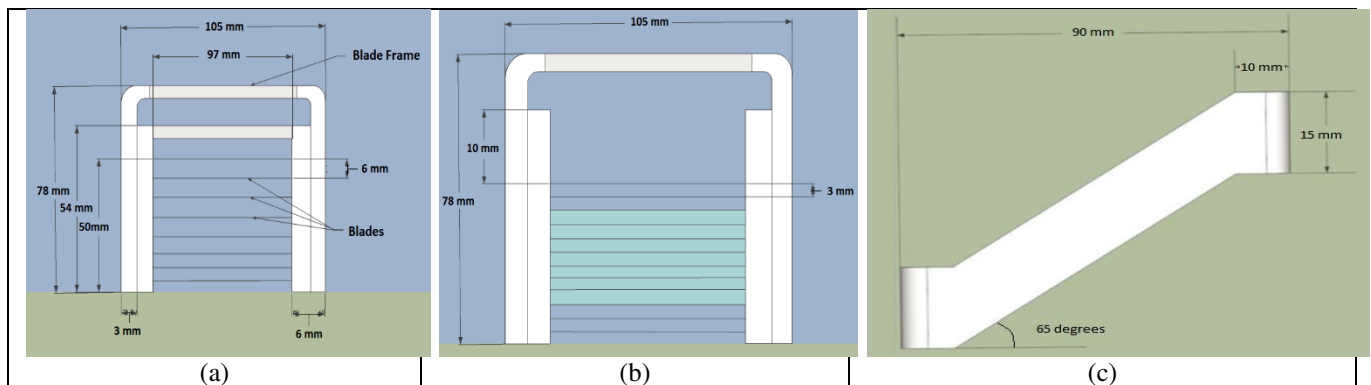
(a) Blade assembly 1, (b) Blade assembly 2, (c) Top view of the blade assembly.
